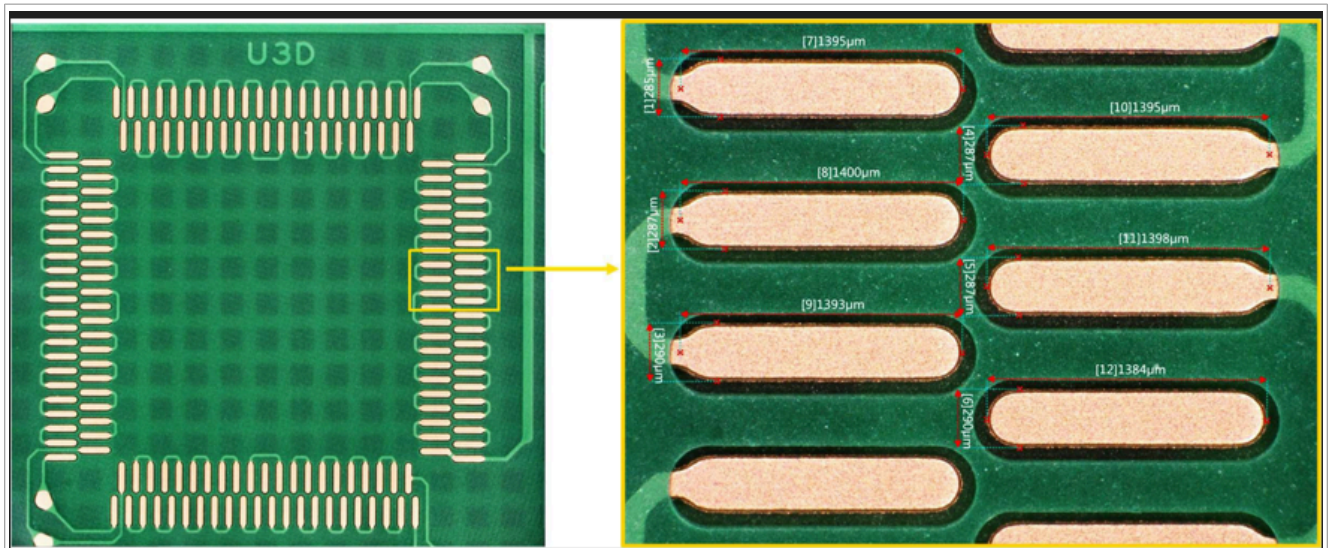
Example of the 172 HDQFP PCB footprint recommended
